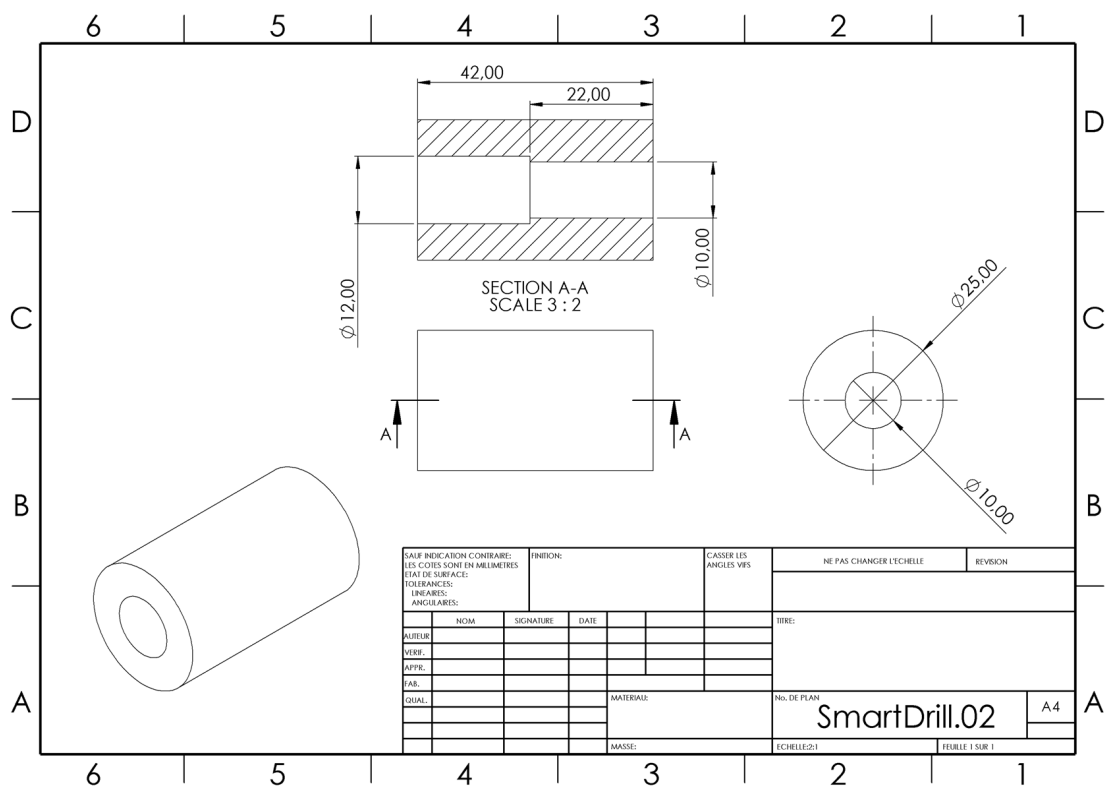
Coupling of the gearbox's and the chuck's axes.
